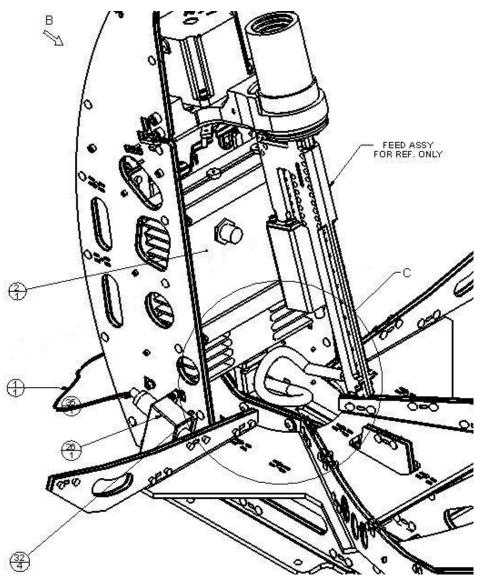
Standard Ku-Band 4W ODU (BUC) Assembly
